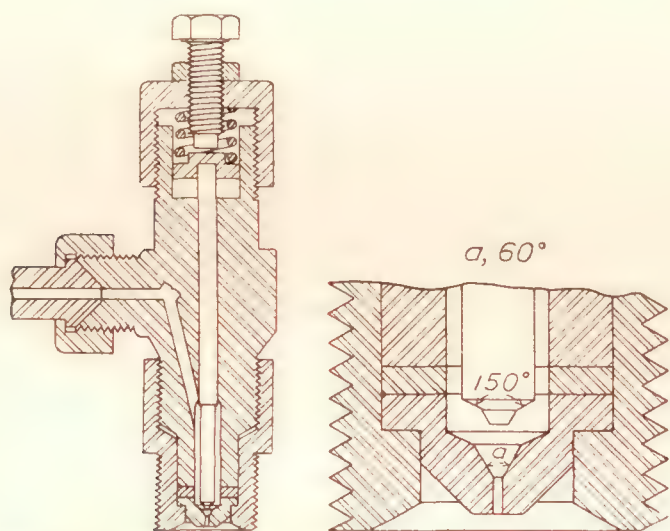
Sketch of automatic injection valve, and enlarged view of nozzle assembled in valve
